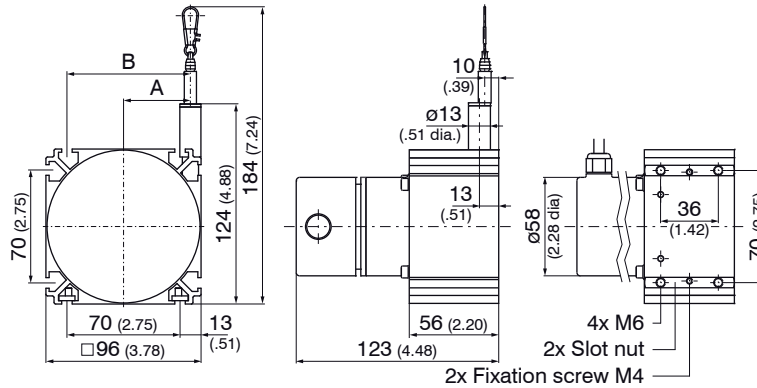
Dimensional drawing WDS- ... - P96 - HTL/TTL, dimensions in mm (inches), not to scale
